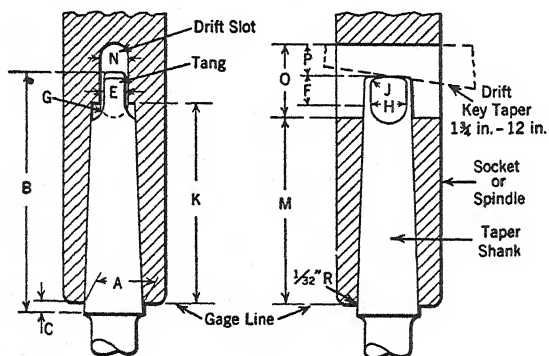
A Sectional View of a Self-Holding Taper Shank Fitted into the Spindle of a Drilling Machine.
